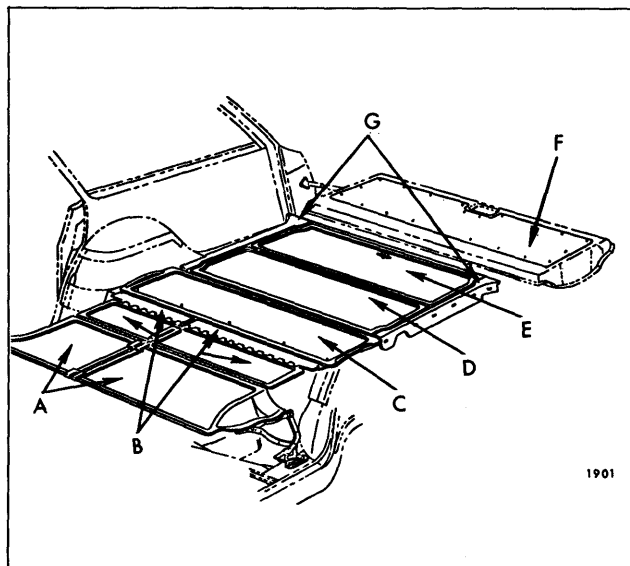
Folding Seats and Floor Panels - Chevrolet "B-45" Styles
